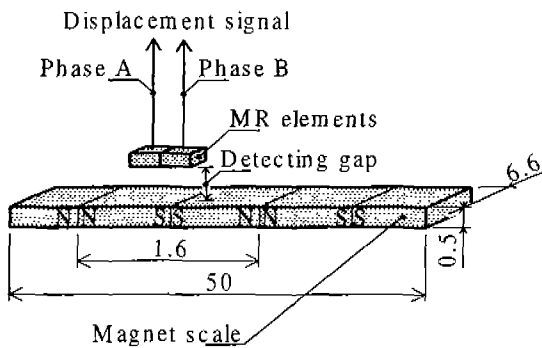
Constitution of the linear displacement sensor using MR element for the linear pulse motor (unit is mm).
